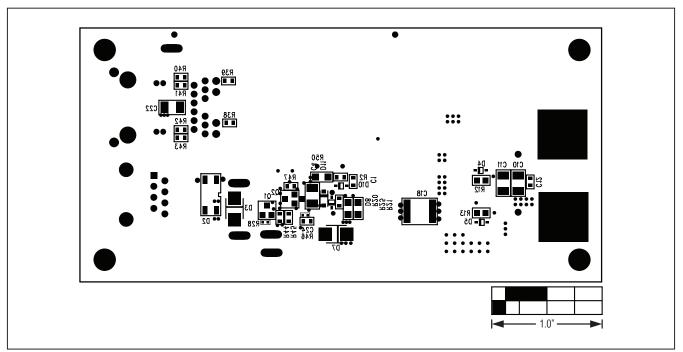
MAX5974A EV Kit Component Placement Guide—Solder Side
